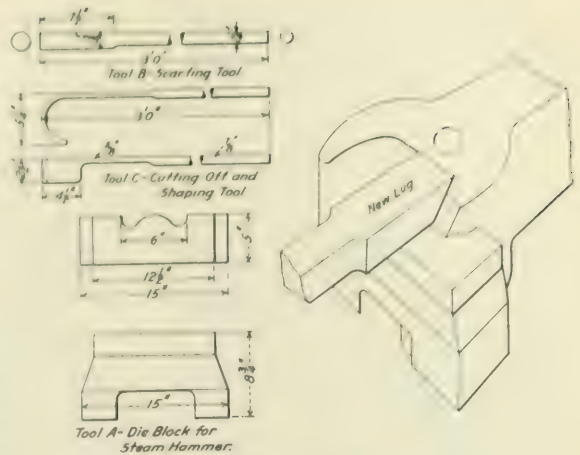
Welding Tools for Broken Steel Couplers.
